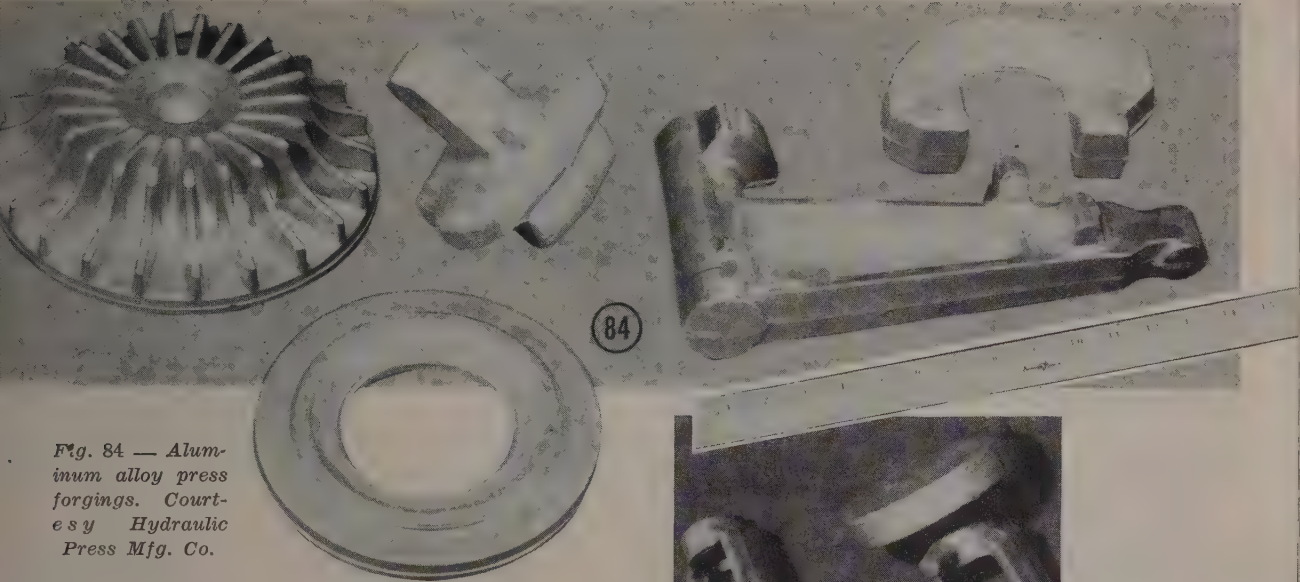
Aluminum alloy press forgings. Courtesy Hydraulic Press Mfg. Co.
